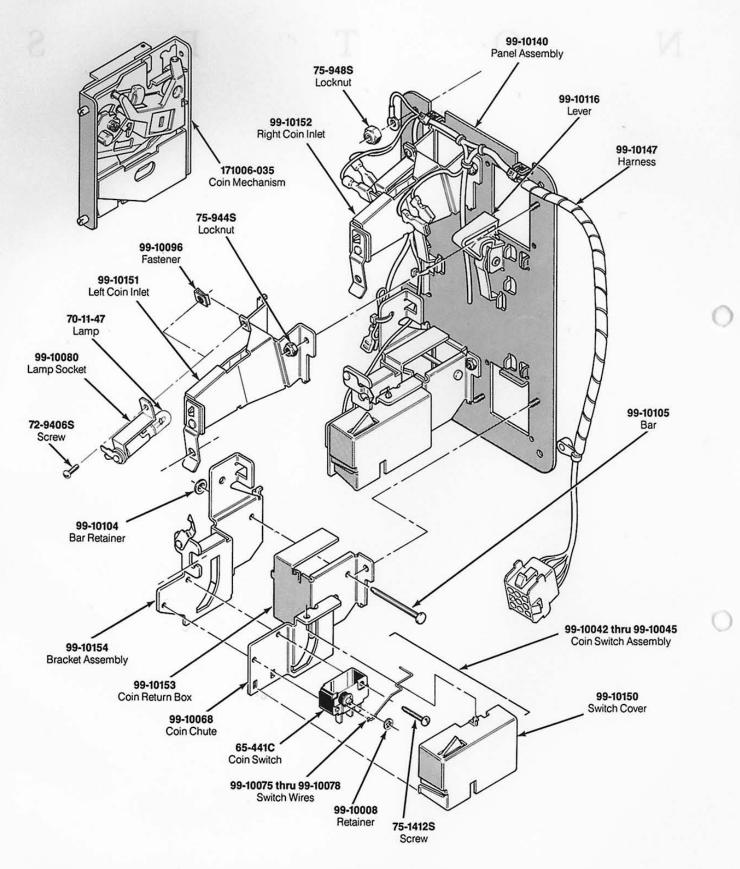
Coin Acceptors, Inc. Coin Door Assembly 171027-001 A
